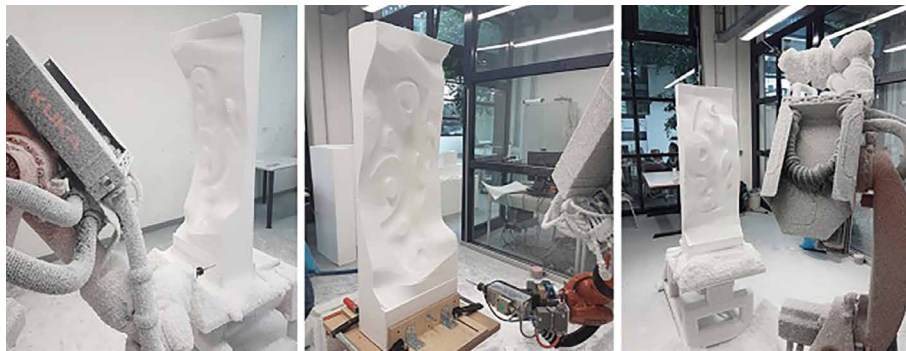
Milling process of the test mold for concrete casting with two parts.
